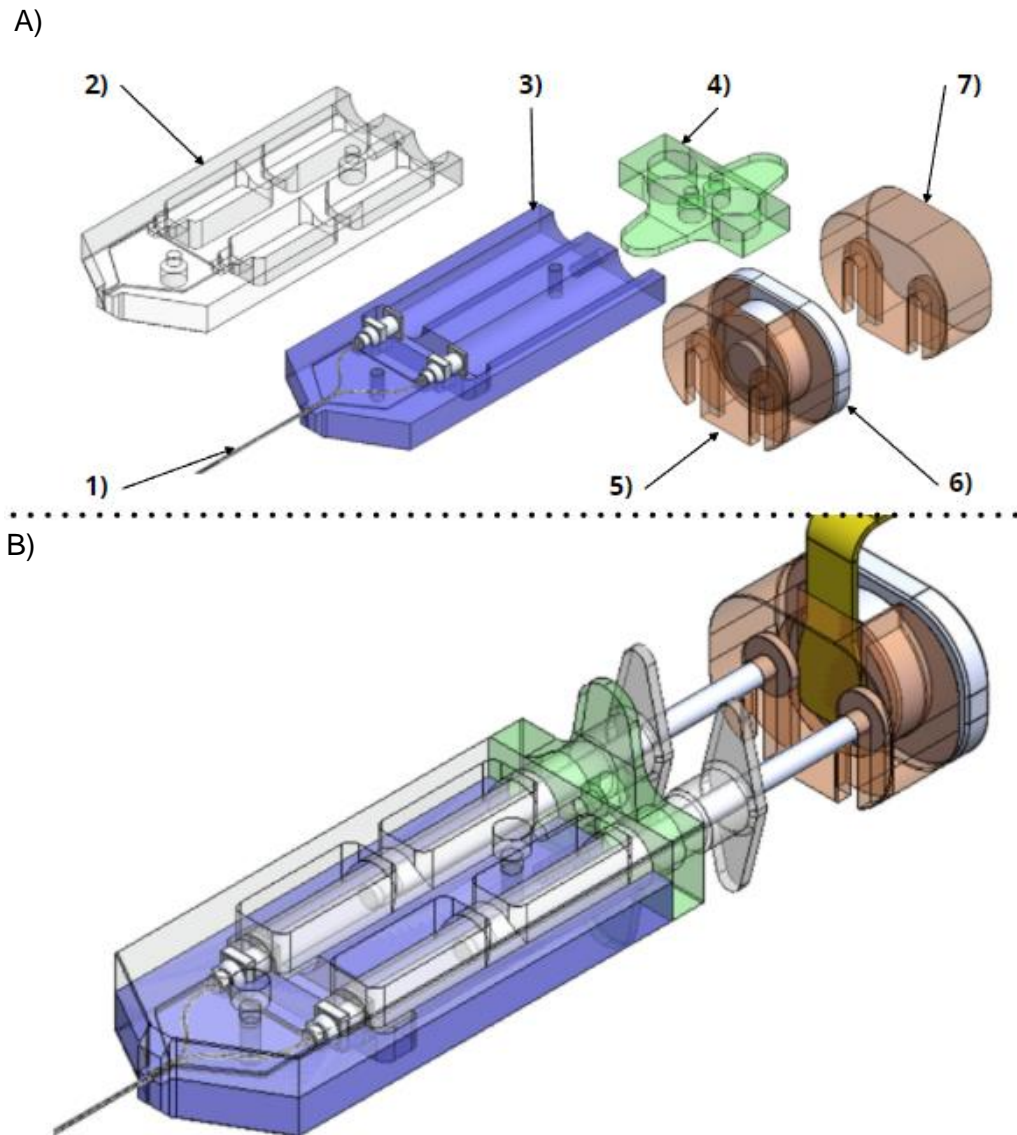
Solidworks renders of agreed design for in vivo study A) Disassembled and B) Assembled
